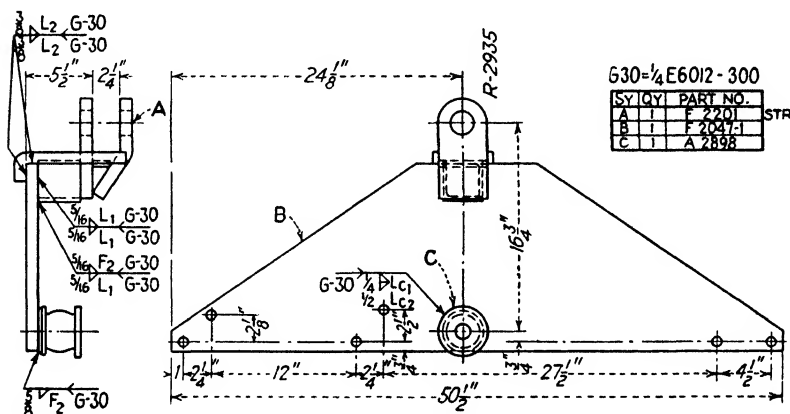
Arc-welding symbols used as shown on this print form a practical means of conveying engineering information in exact and complete detail to the welding operator, welding foreman, and welding inspector. (Courtesy of R. G. LeTourneau, Inc.)
